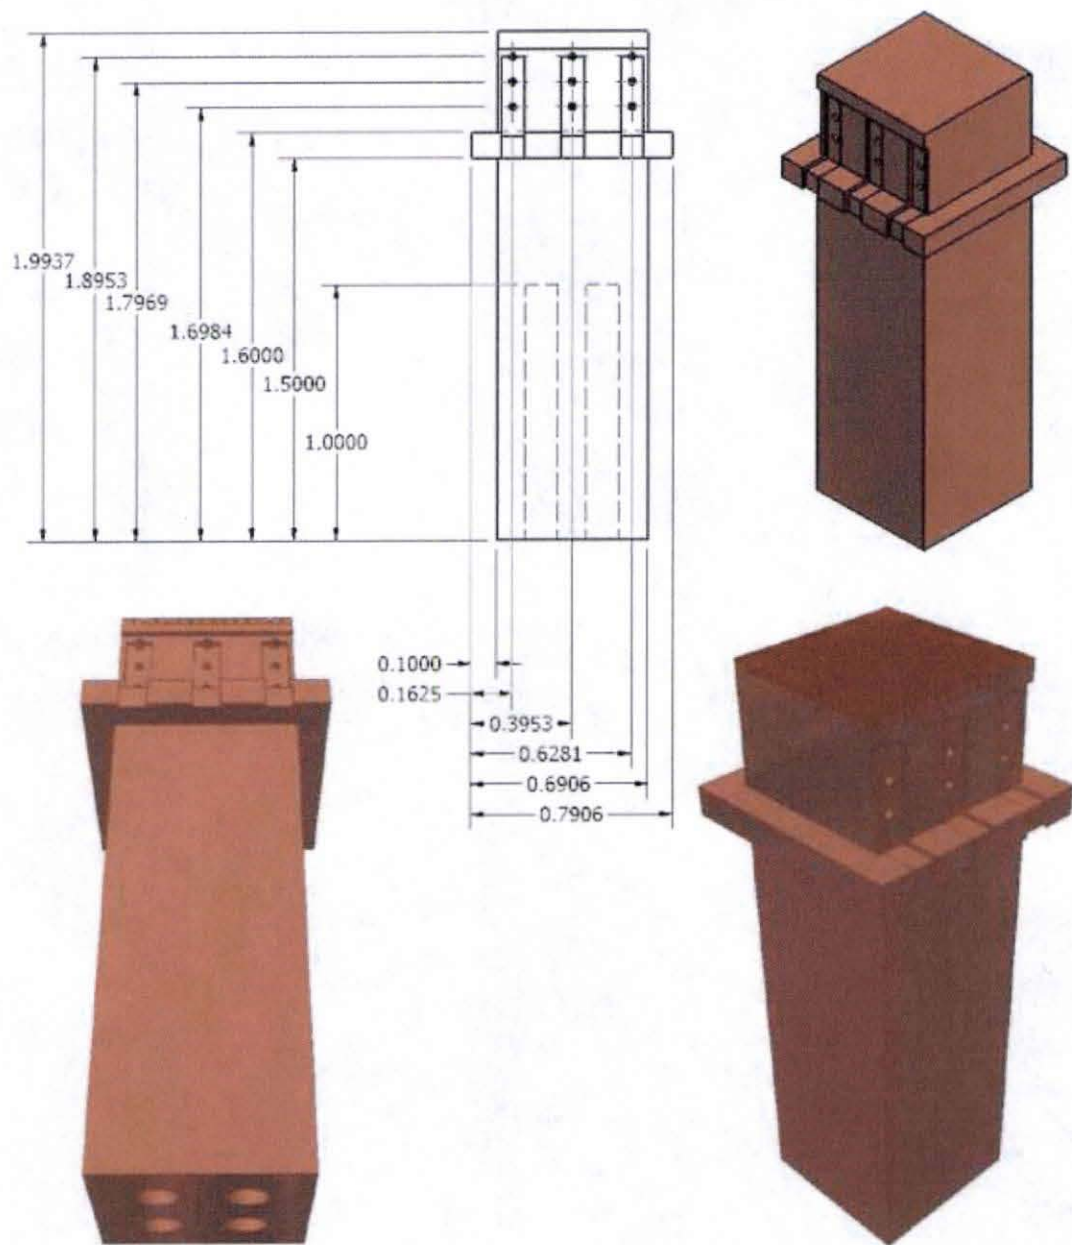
Solid model and drawings of the two-phase heat sink test section.
